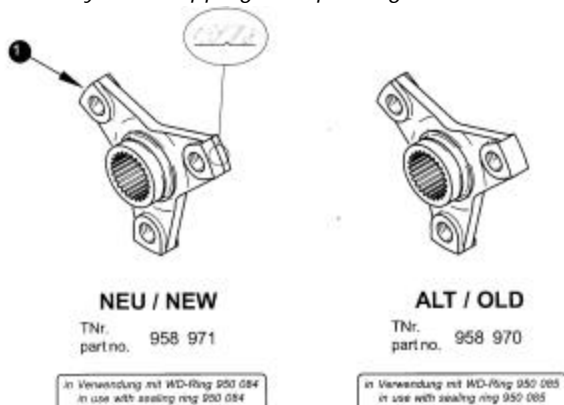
New gearbox come with an improved spider and matching seal. Be sure not to mix old and new style spiders and seals. Leakage will occur.
